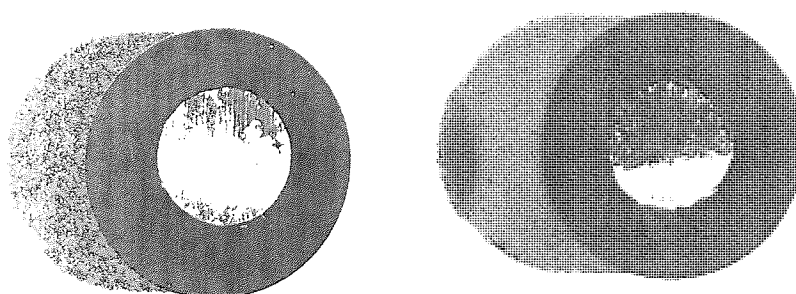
Photograph showing castings from two TMCS treated moulds.
